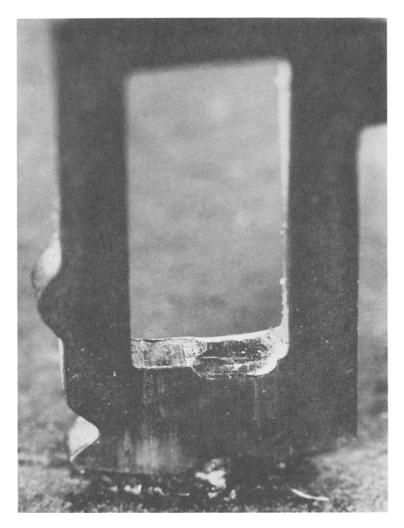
Ilco disc tumbler from a lock cylinder that had been operated 5000 times with the key. Disc width is 4.85 mm (0.191 in.) and thickness is 0.73 mm (0.028 in.).
